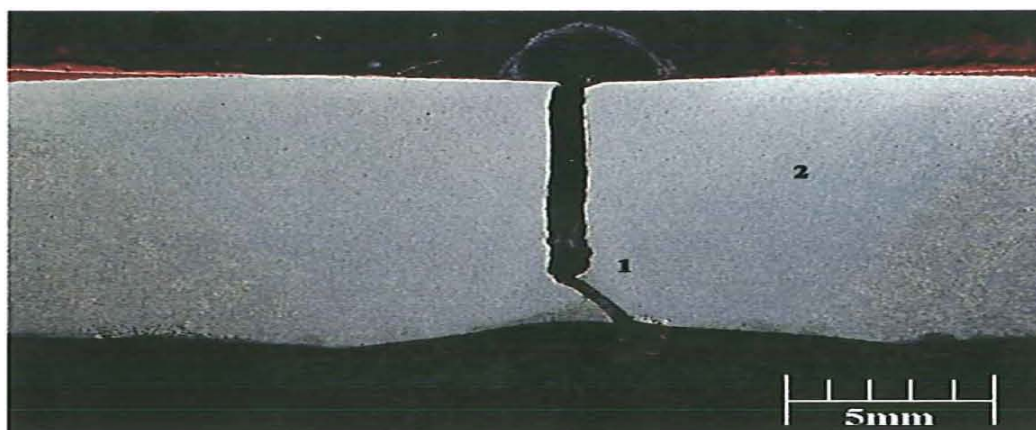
Cross Section of the Cold Weld Shown in Figure 18
